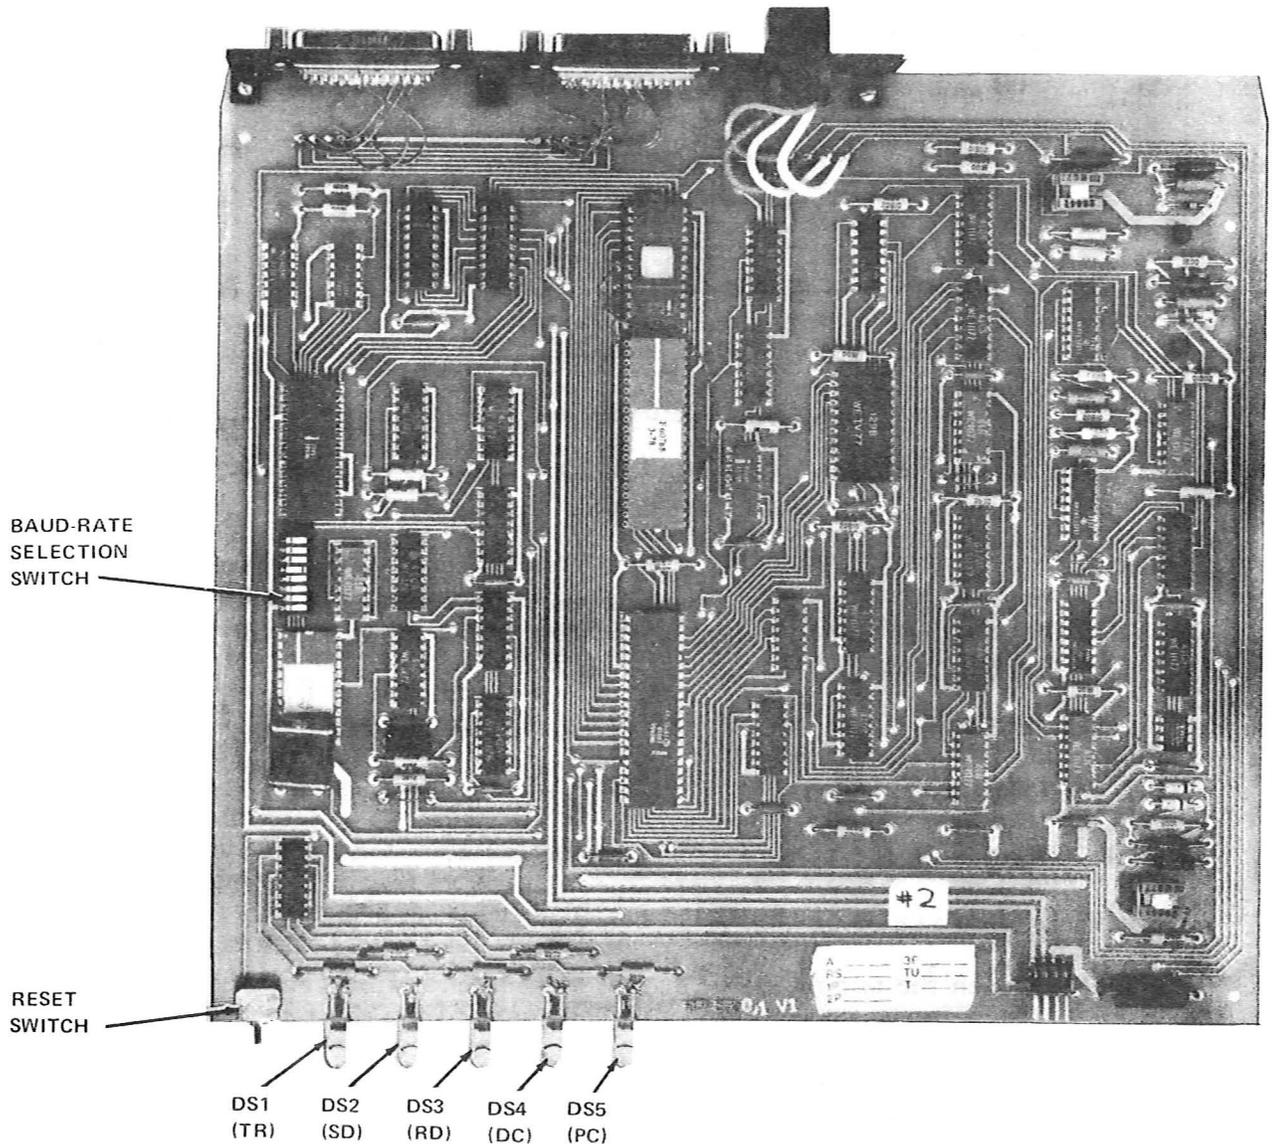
HN9B or HN11 Circuit Pack (Controller Board)
